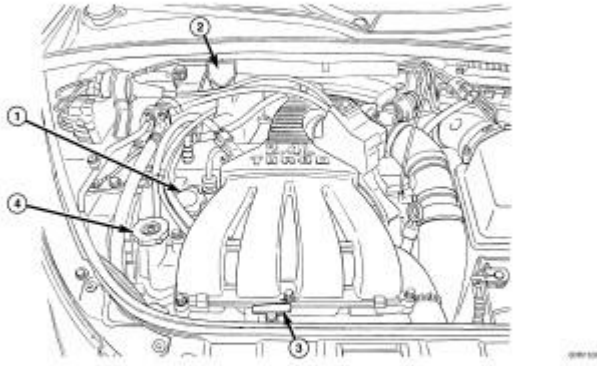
Engine Oil Dipstick and Fill Locations - 2.4L Turbo
